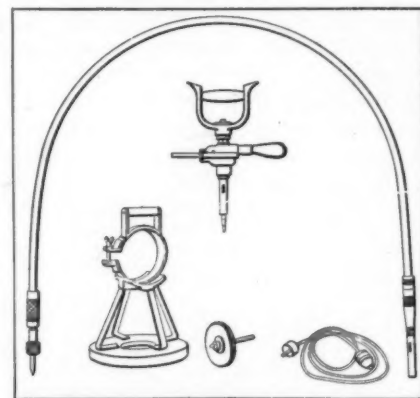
Special equipment that can be used in connection with the Pioneer valve grinder and drill as shown in Fig 1
